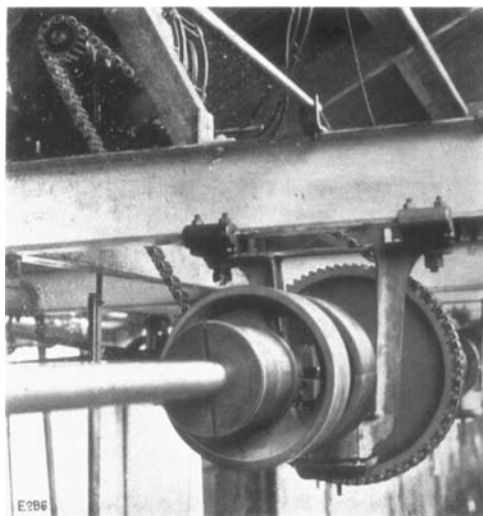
Motor connected to Line Shafting by Noiseless Drive Chain.
